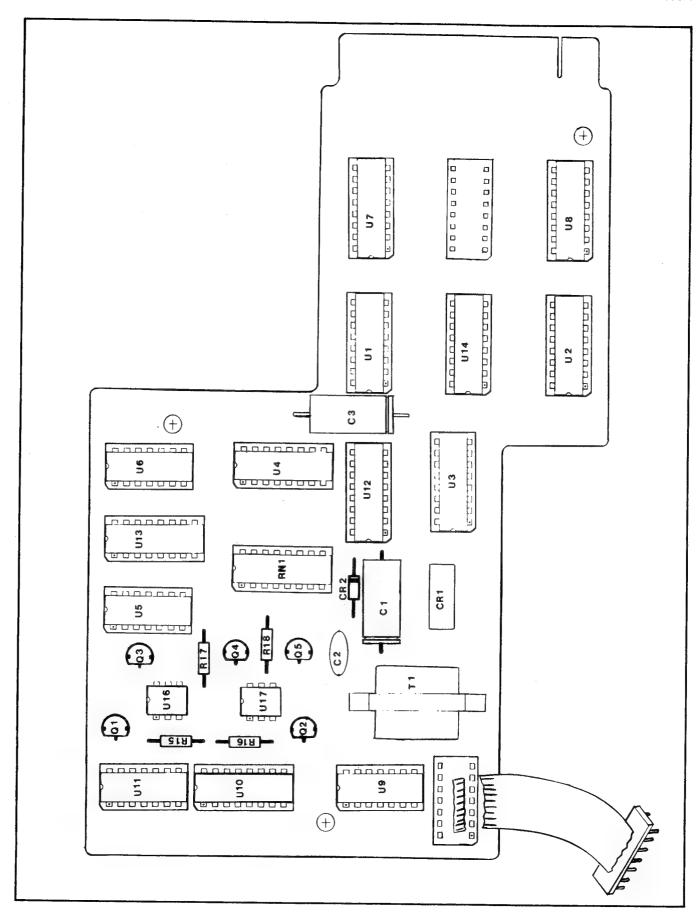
DOU PCB ASSEMBLY -02 Option
